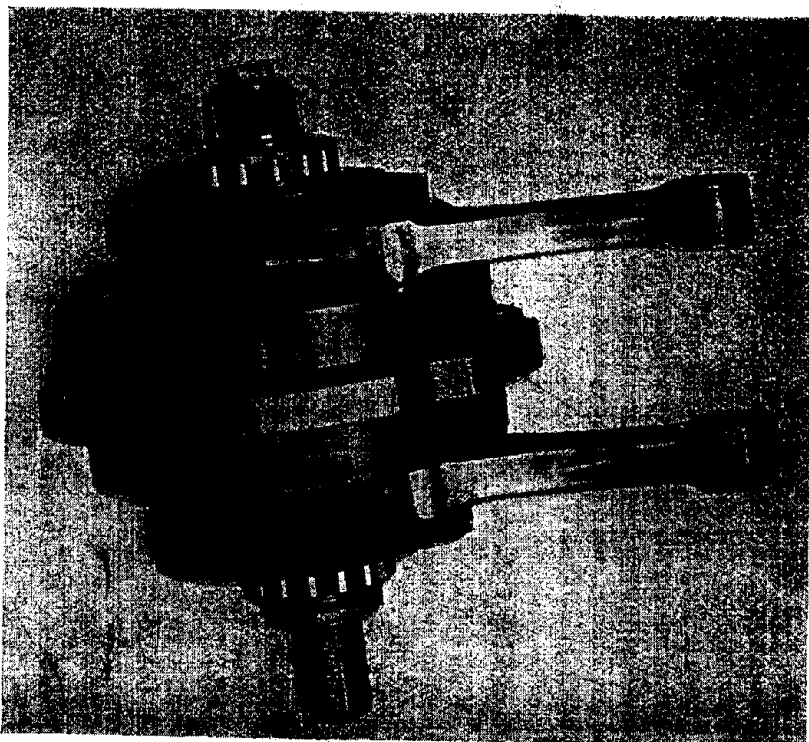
ROTATING ASSEMBLY OF THE MODEL 20.
